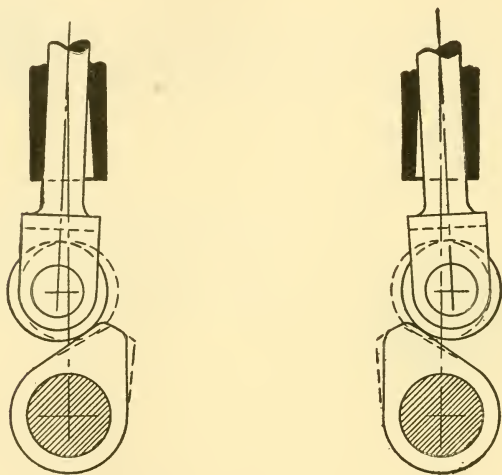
Valve push rod with roller shown in lifting and seating positions, showing the serious defects of a worn push rod bushing. The dotted cams and rollers indicate the position these parts would have with the same amount of lift if there were no lost motion.
